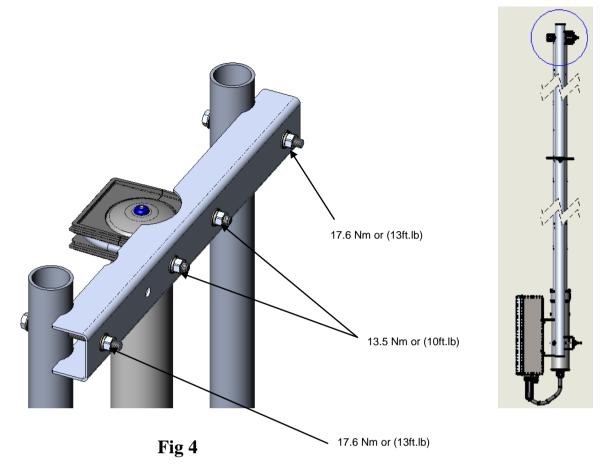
Assembled view of (PEANUT TYPE) Steering pole assembly connecting to the cap of antenna.
